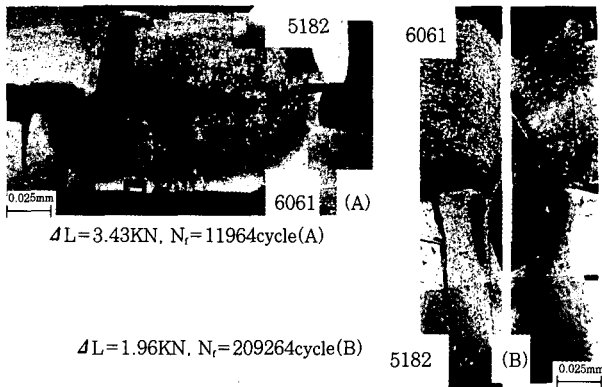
Fatigue crack on weld nugget of dissimilar Al weld part
